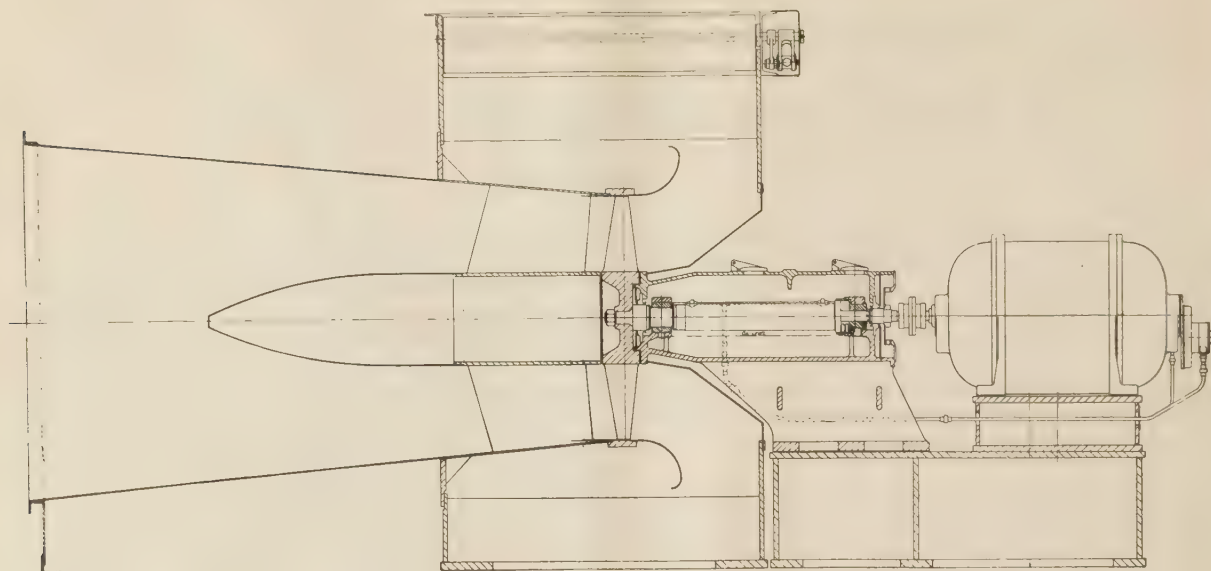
CROSS-SECTION ASSEMBLY OF THE FULL-SIZE UNIT
